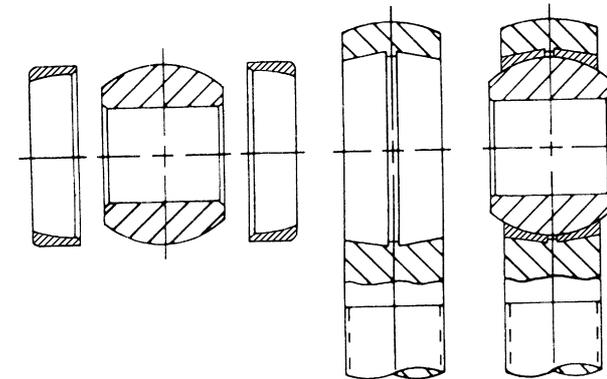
4- PIECE, INSERT-TYPE ROD END
